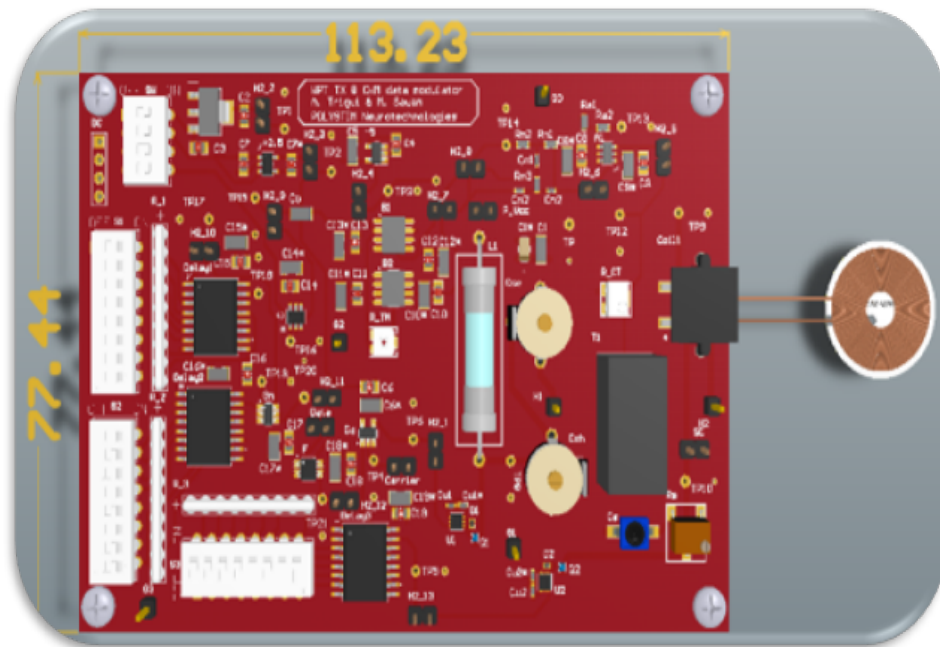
3D top view of the transmitter circuit board. The dimensions are in millimeters
